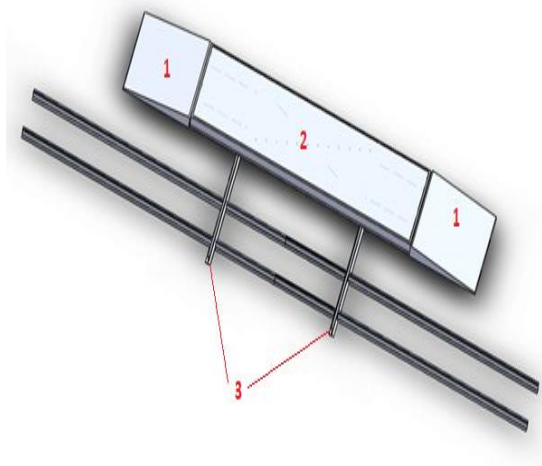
Loading post for horizontal transverse loading of bimodal semi-trailers
